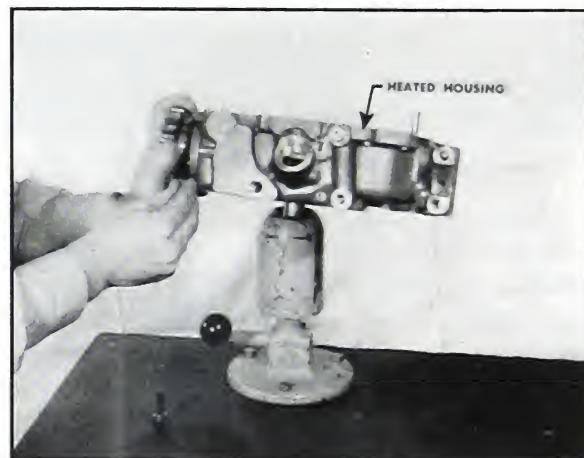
Assemble camshaft to heated main housing lining up the marks made during disassembly will eliminate lengthy timing procedure.
